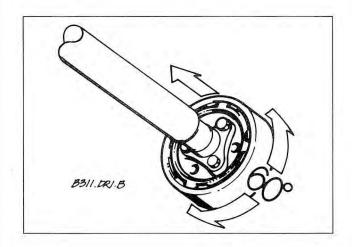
On models with vibration damper, turn damper 60° in either direction before pulling driveshaft off transmission flange.
